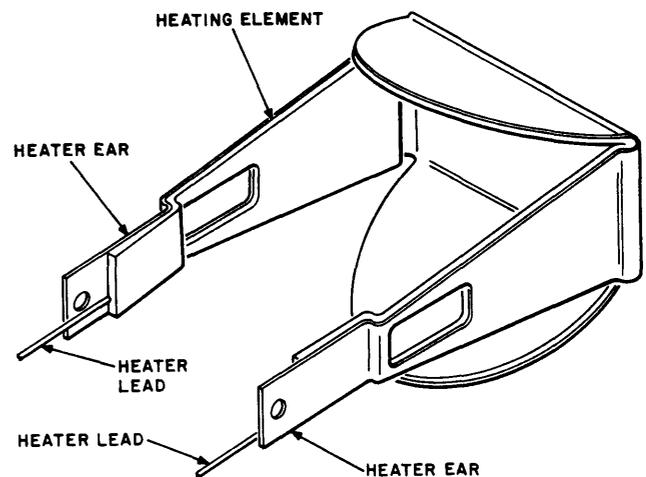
Feed Heater Assembly (Gabriel Electronics)
